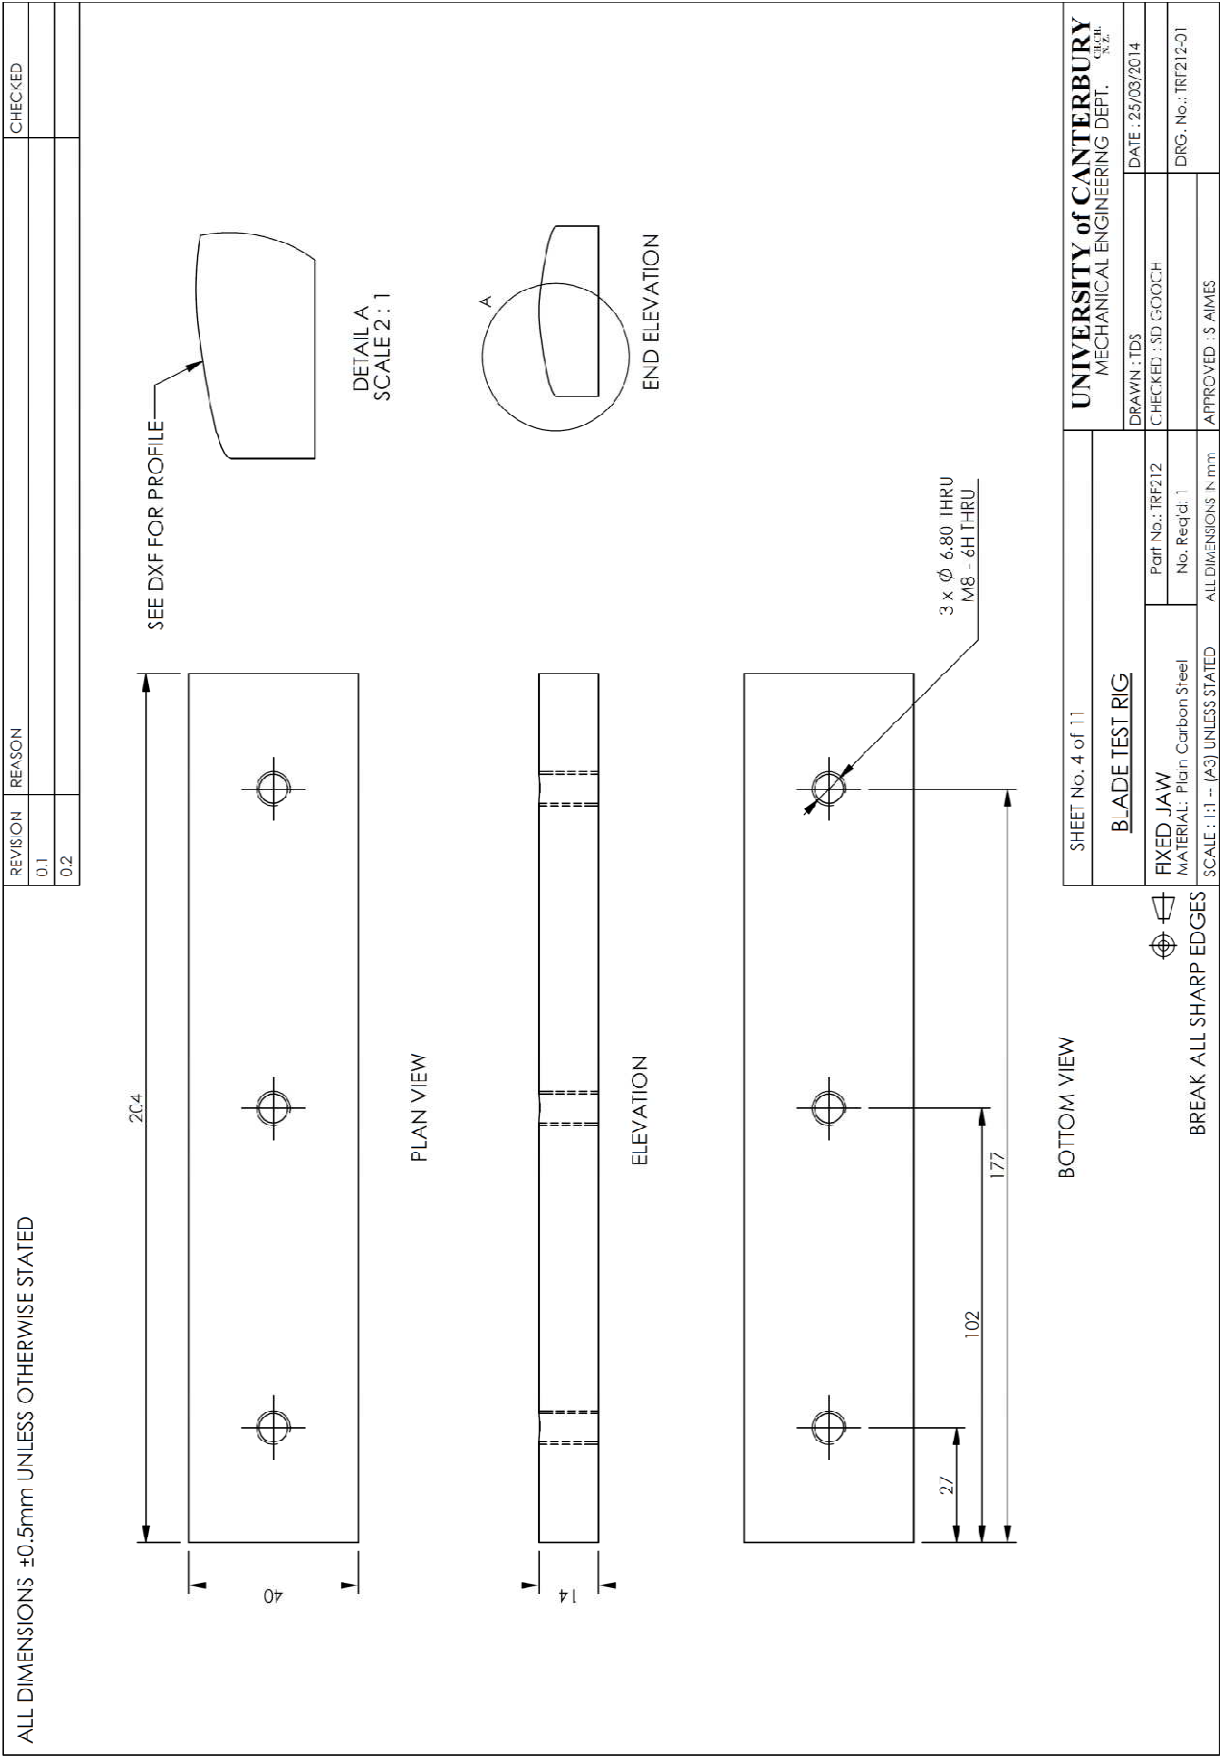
Manufacturing drawing of the fixed jaw in upper pivot of the fatigue testing rig.
